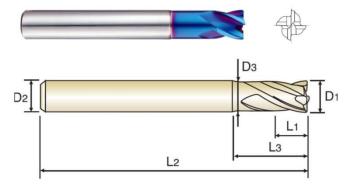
The G8A02080 X5070 End mill technical drawing [21].
